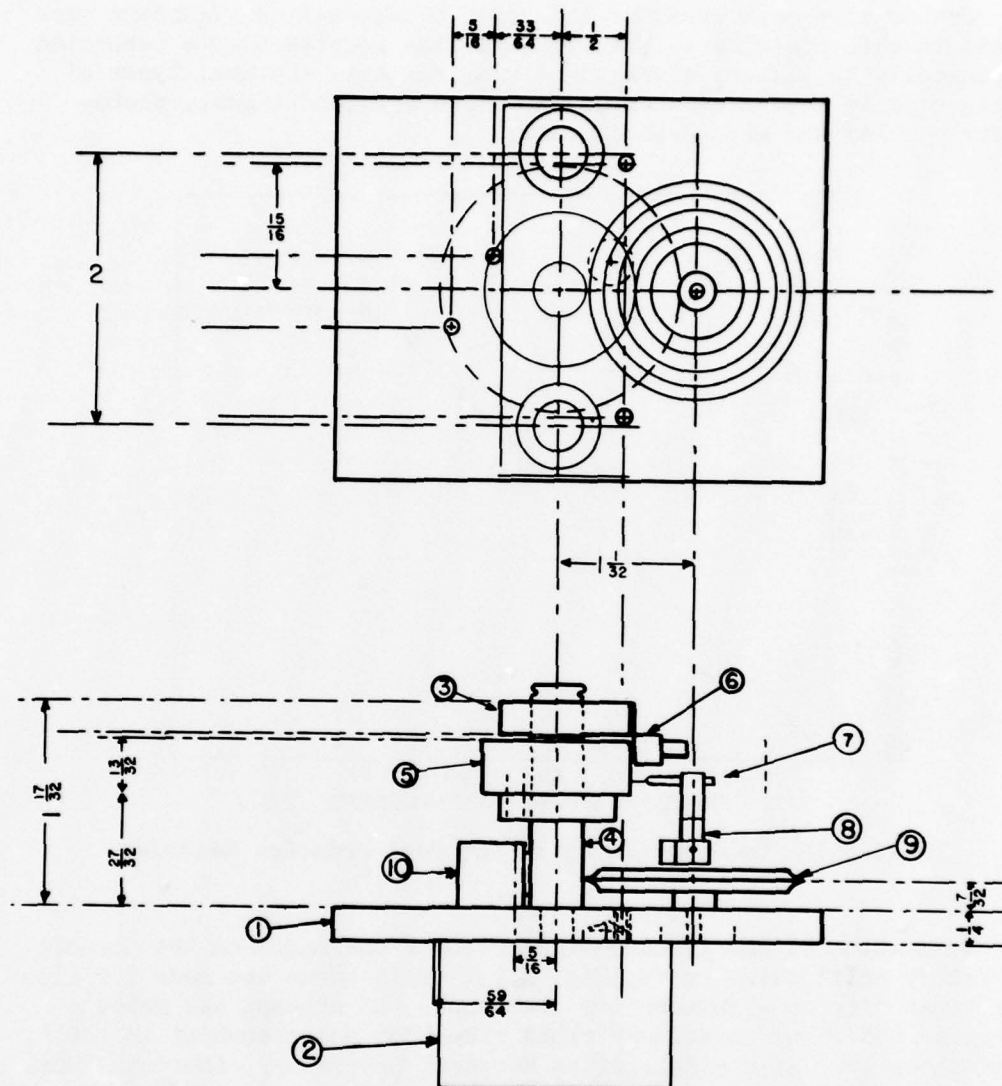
Electric Motor Pressure-time Recorder, Mechanical Drawing.
